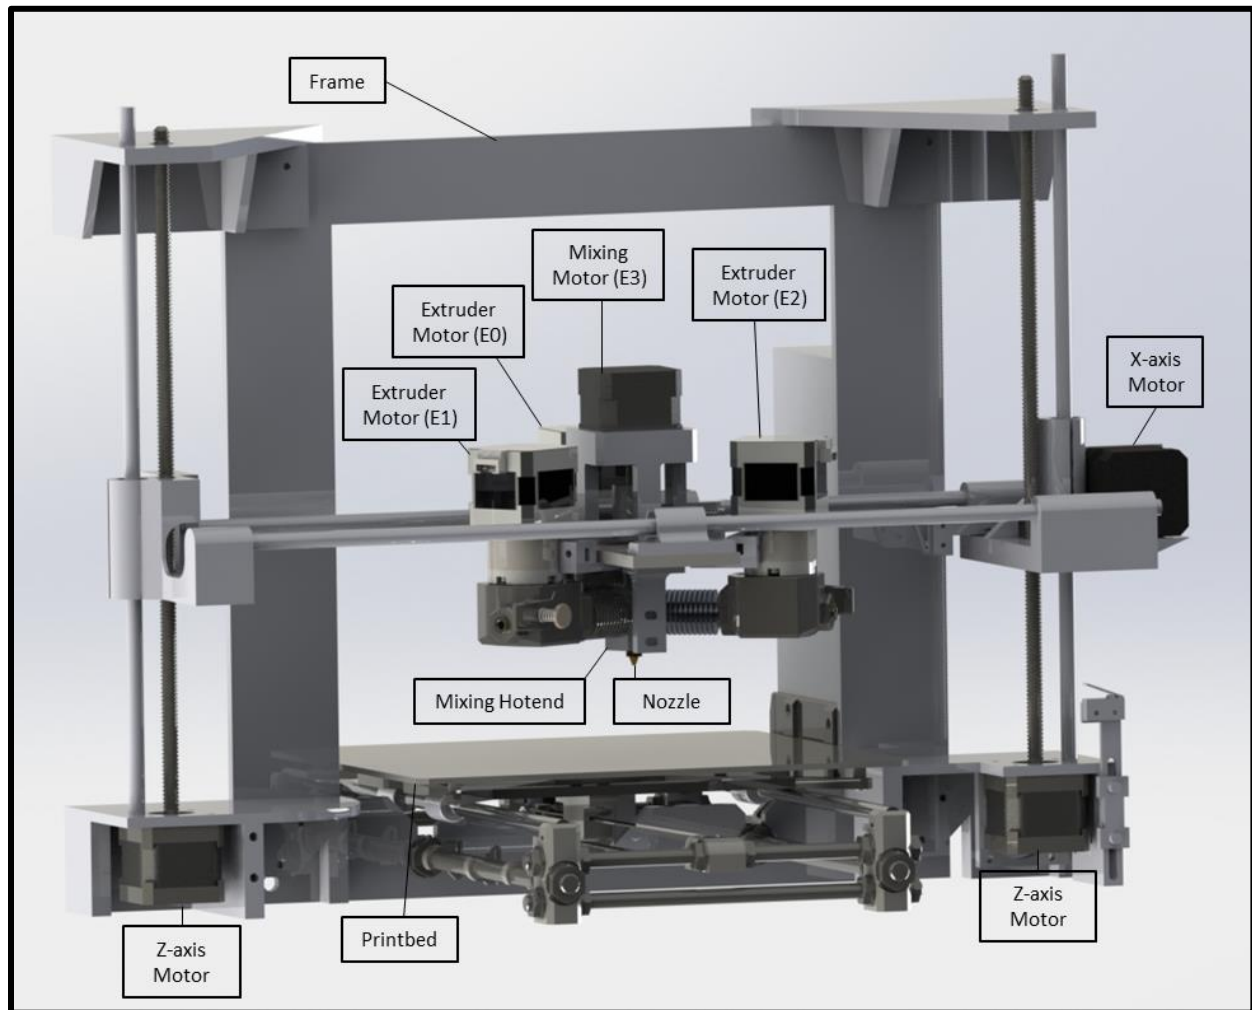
Computer model of MP2 assembly including printer mechanics, custom carriages, mixing hotend, and printbed. Inductive sensor is located behind extruder motor E1.
